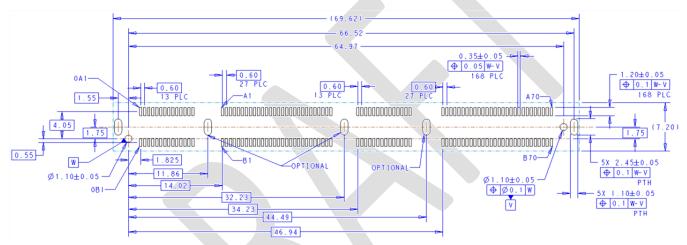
4C+ STRAIGHT CONNECTOR FOOTPRINT (MM)
